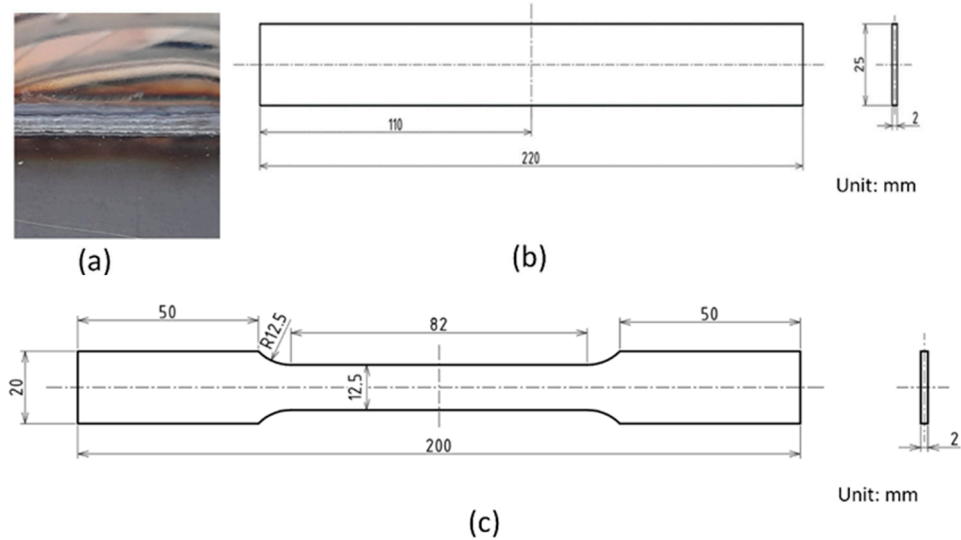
Dissimilar weld joints and testing shapes: (a) dissimilar welding sheet, (b) bending test shape according to ASTM E8/E8M-13 standard [40], and (c) tensile test shape according to ASTM E290 standard [41].
